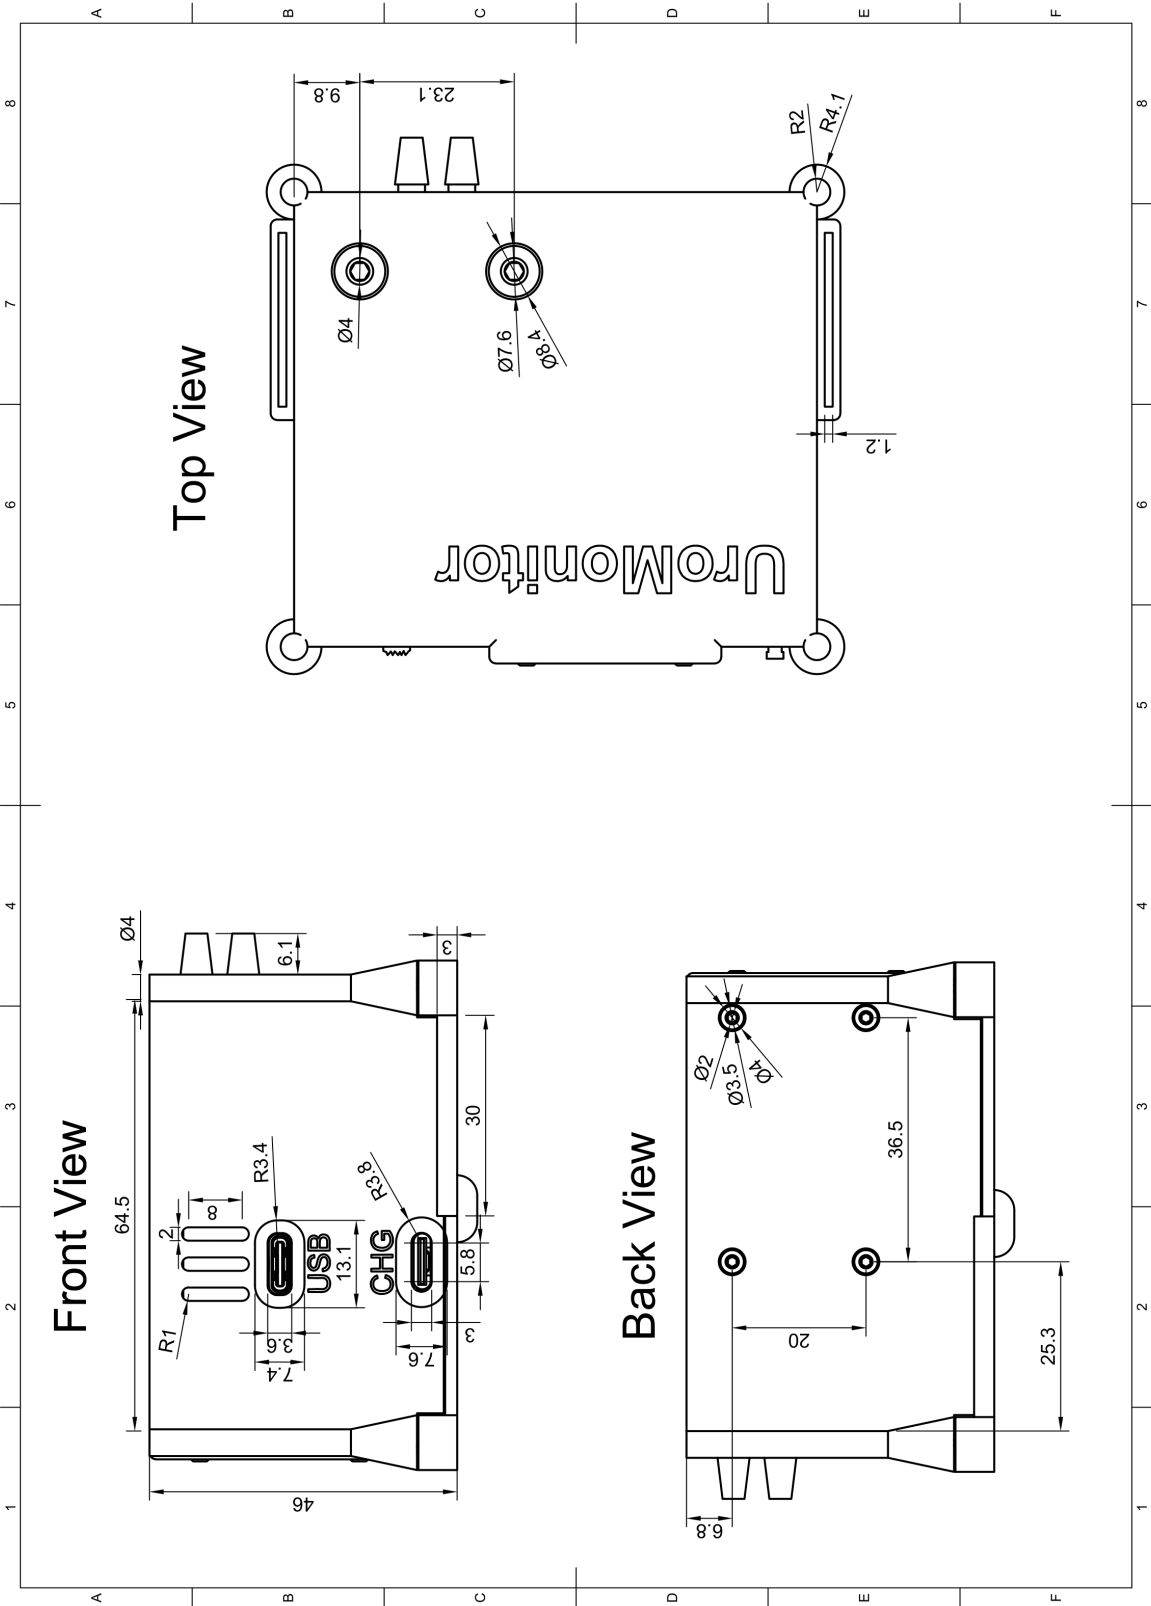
Detailed front, back, and top views of the enclosure, highlighting the ventilation slots and USB port cutouts (front view), microSD card module mounting holes (back view), and MPX5050DP pressure sensor mounting holes (top view).
